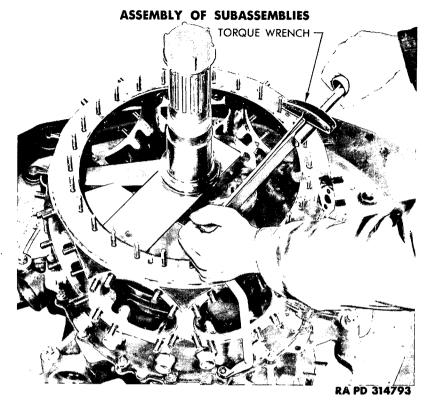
Tightening Main Crankcase Mounting Stud Nuts Using Wrenches 41-W-872-375 and 41-W-3631
